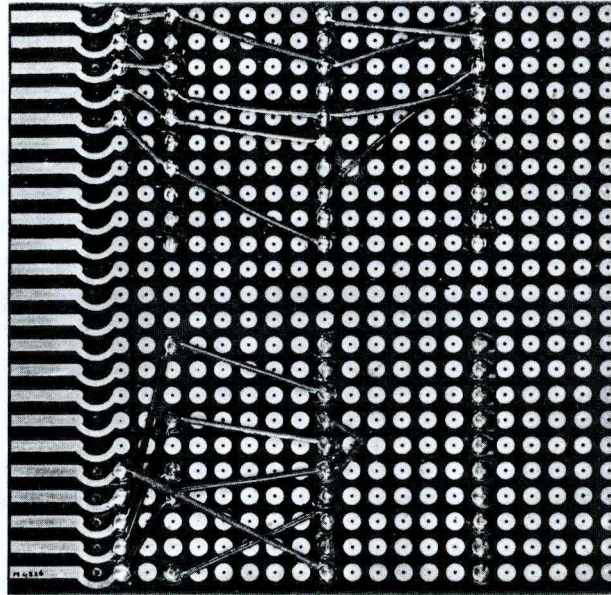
Rear side of an experimenter's printed wiring board with circuit blocks mounted on it.
